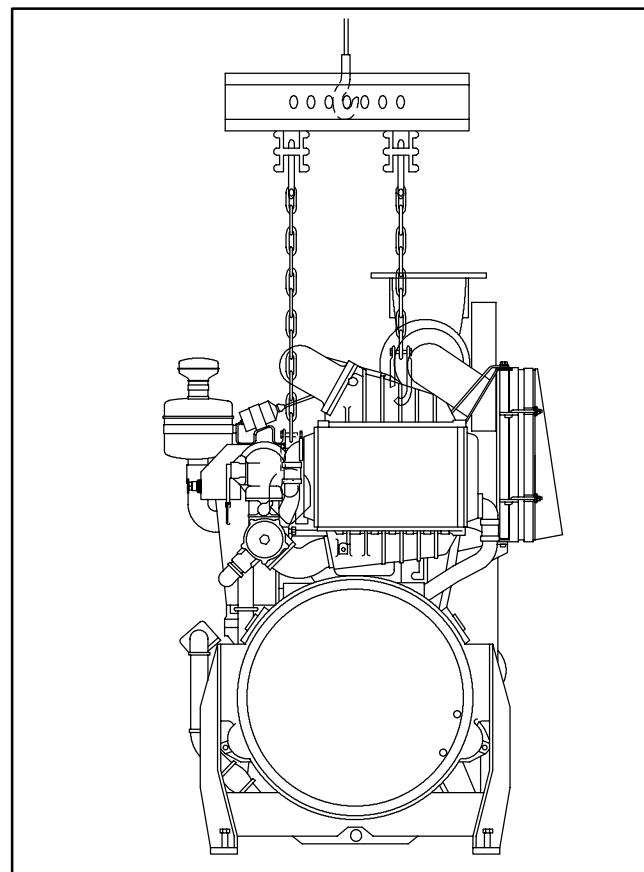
Correct Method Of Lifting Engine - Rear View
